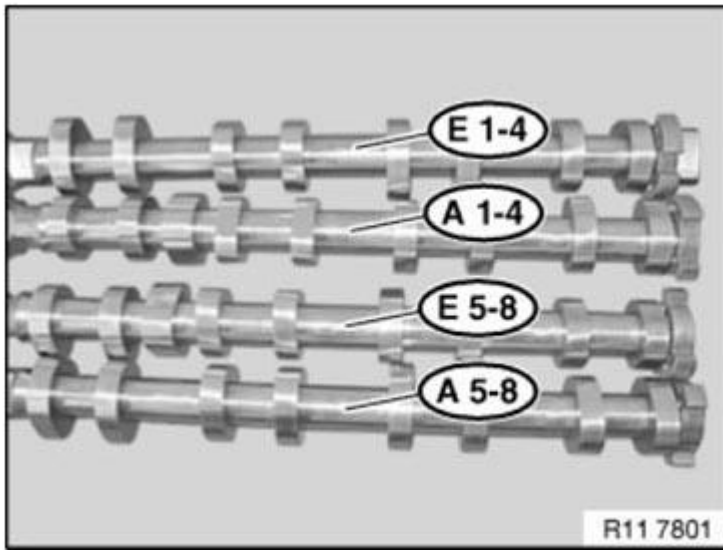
Identifying Camshaft Of Cylinder Bank Mark
